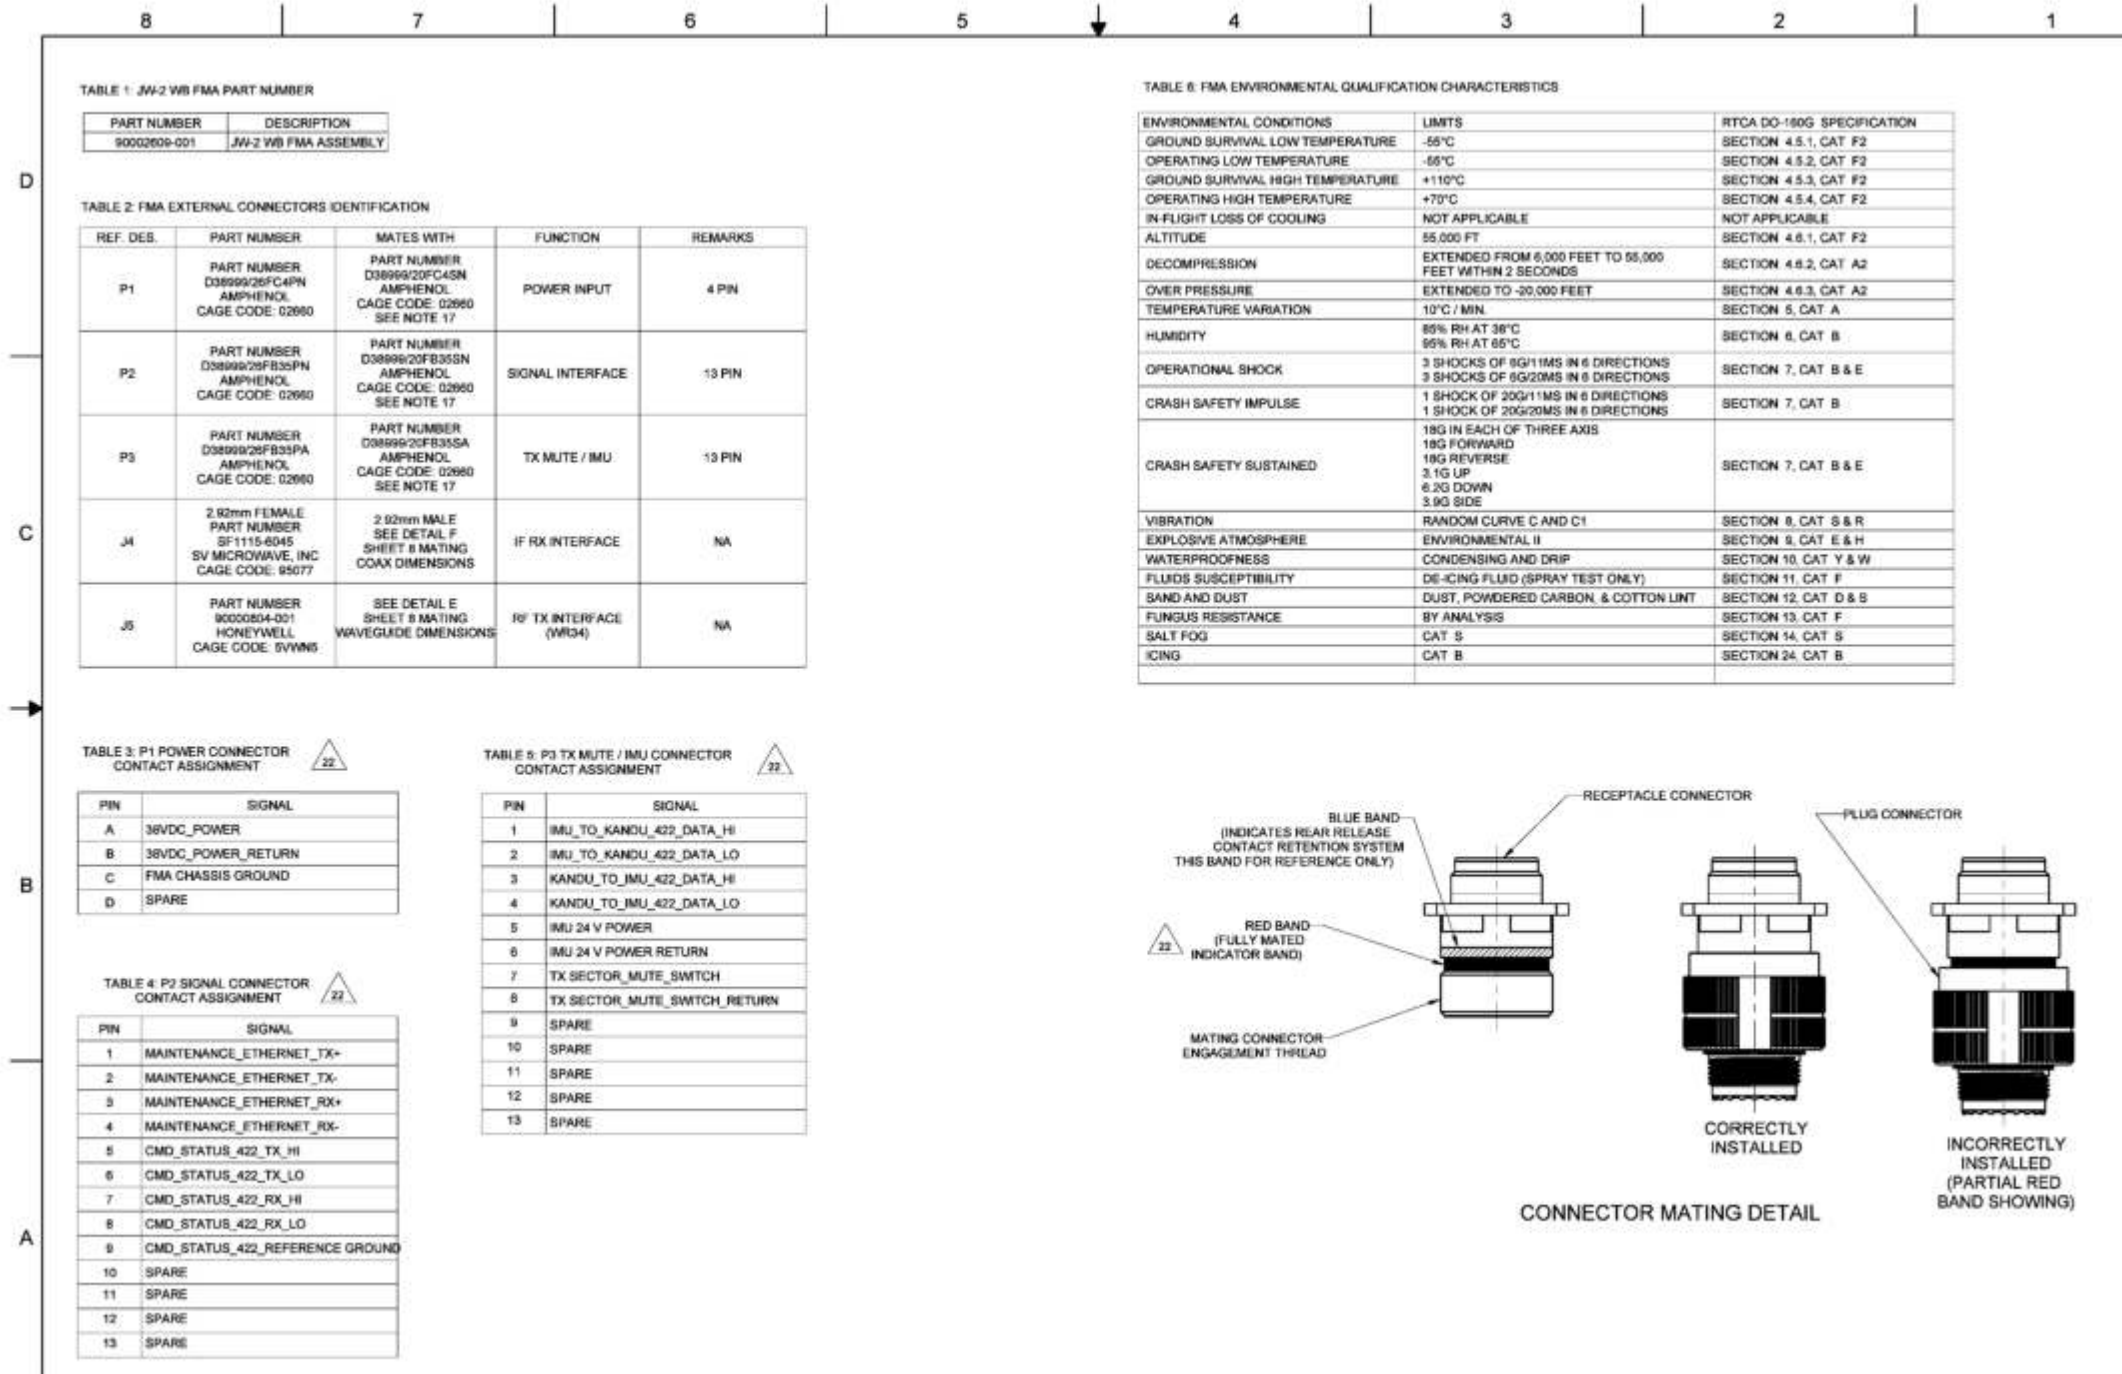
(Sheet 1 of 14) FMA Outline and Installation Drawing (90002609-001)
